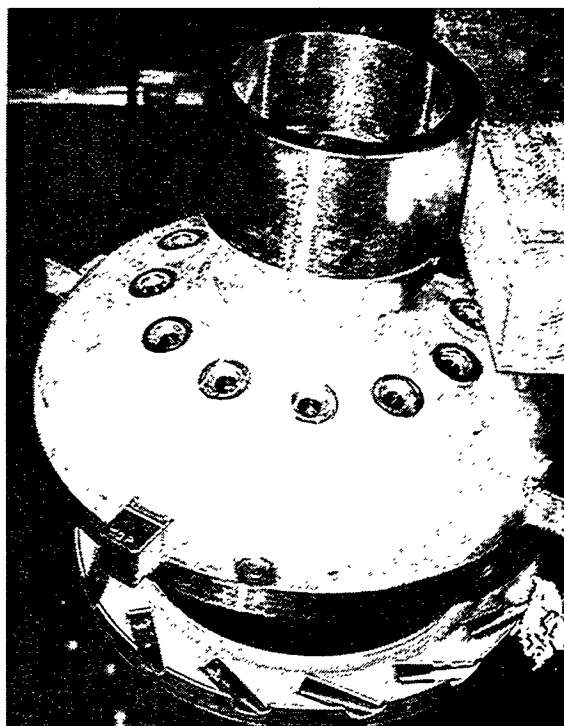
Inner Casing Assembly With Nozzle Ring Showing Cooling Holes in Cast Struts
